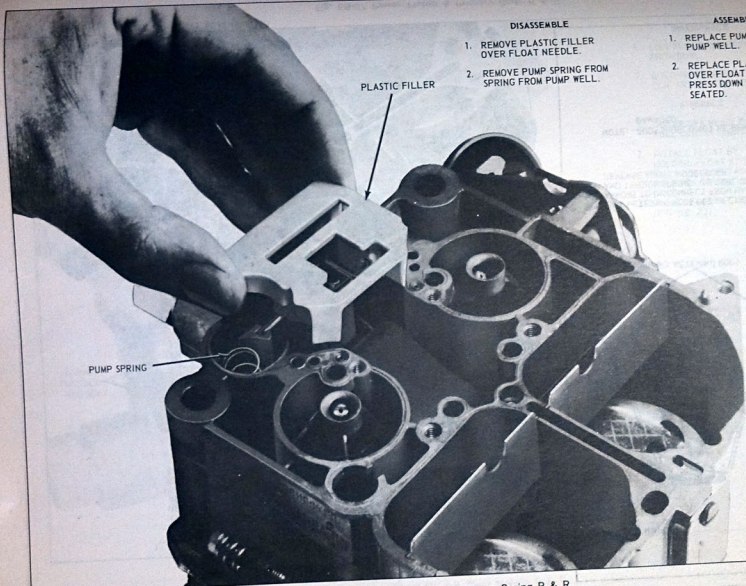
B-66 Plastic Filler & Pump Spring R & R
